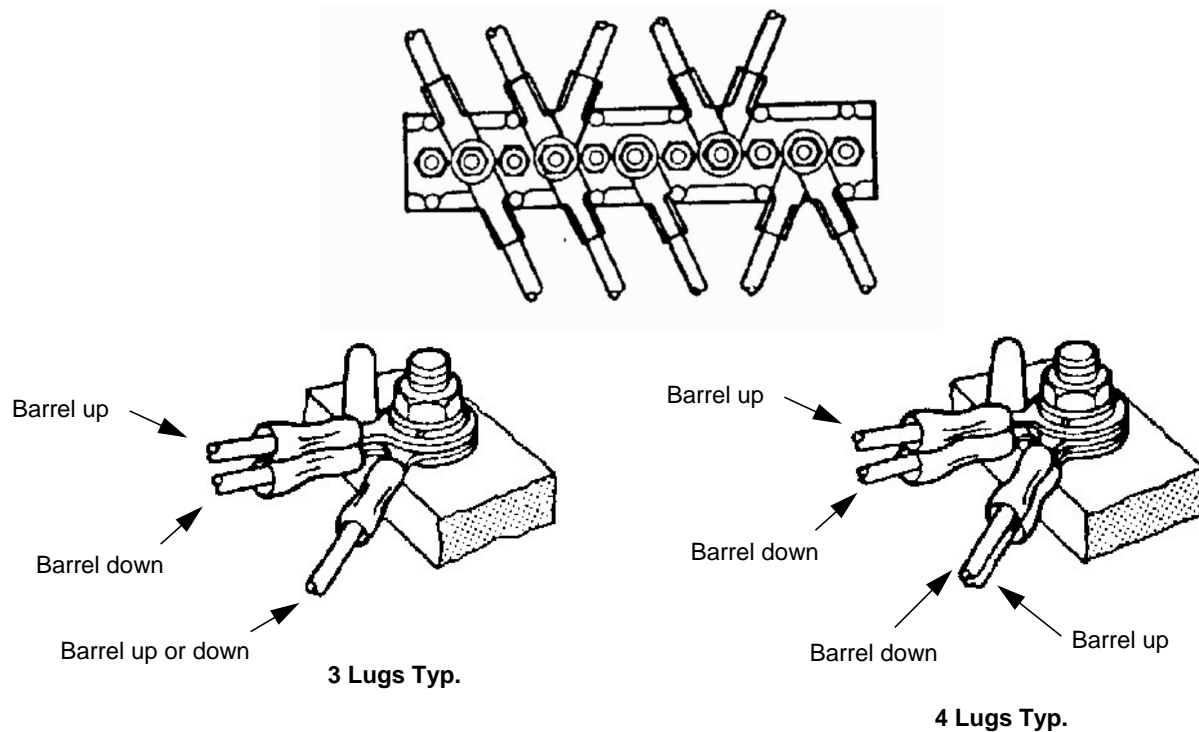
Assembly of Terminal Lugs to MS27212 Terminal Boards
